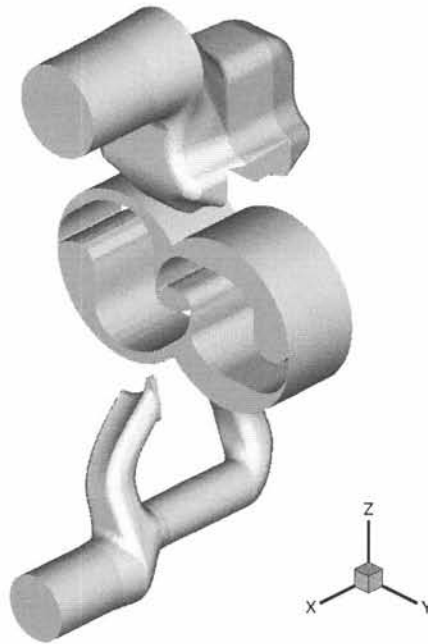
Exploded view of the double-tooth compressor geometry in figure 6.3
